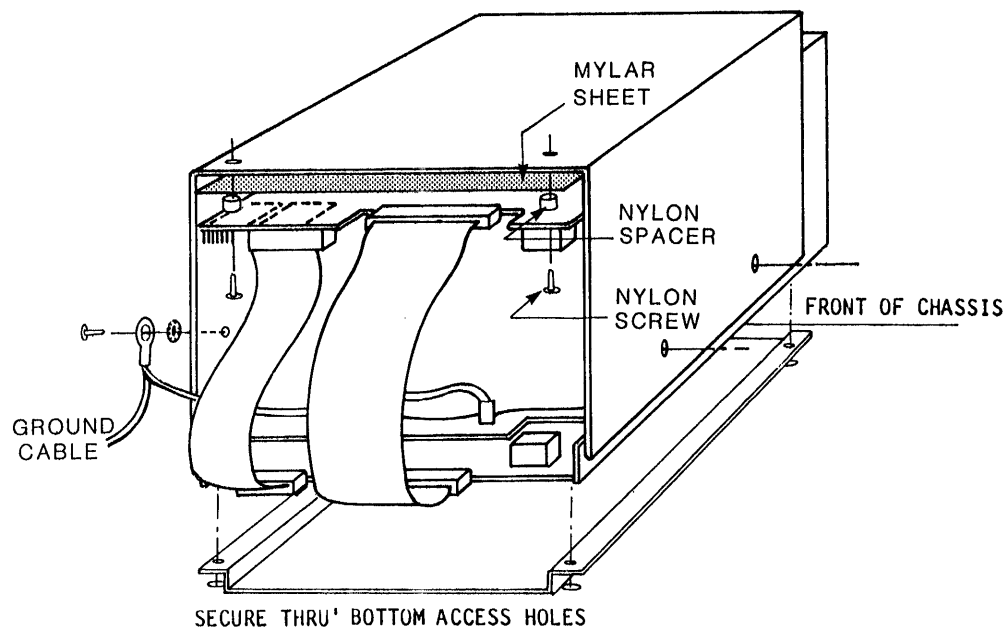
5-1/4" WINCHESTER FORMATTER MOUNTING
